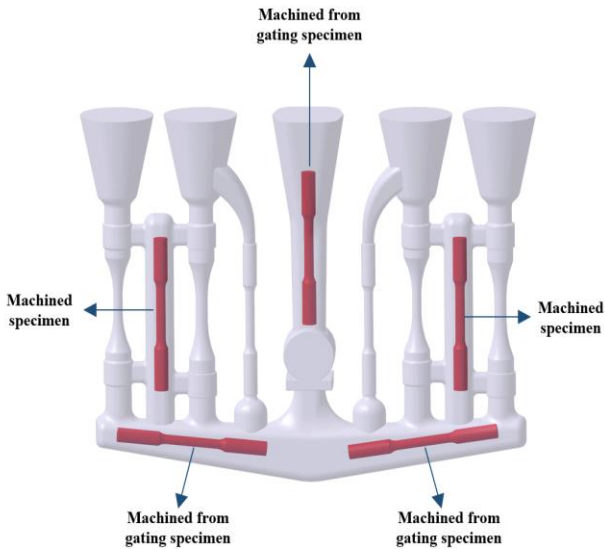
Machined specimen locations taken from rectangular specimen and gatings (shown by red color)
